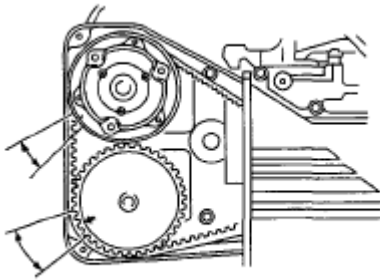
Measuring #2 Cylinder Intake Valve And #4 Cylinder Exhaust Valve Clearances
